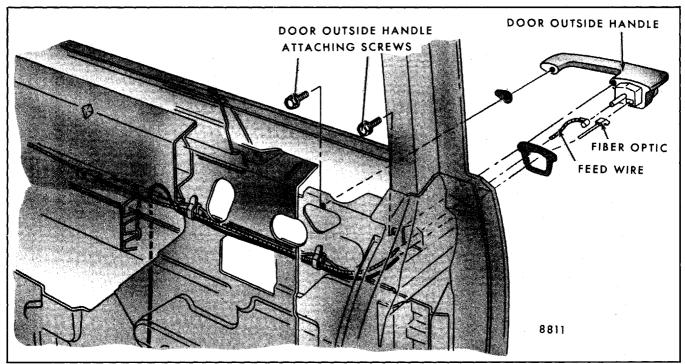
Illuminated Lock Cylinder - B, C and K Styles (Push- Button Handle Shown)
